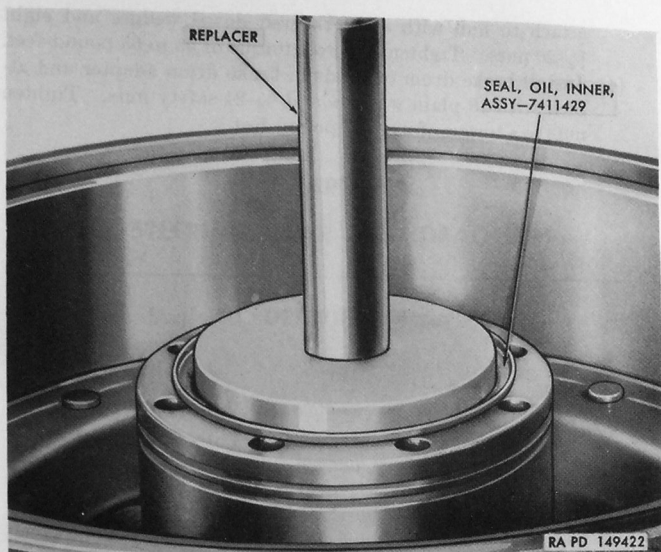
Installing inner oil seal with replacer 41-R-2392-635.
